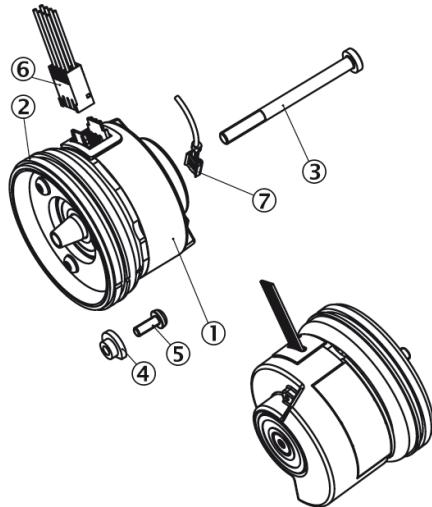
Mounting figure of SRS50S/SRM50S, conical shaft, resolver support
